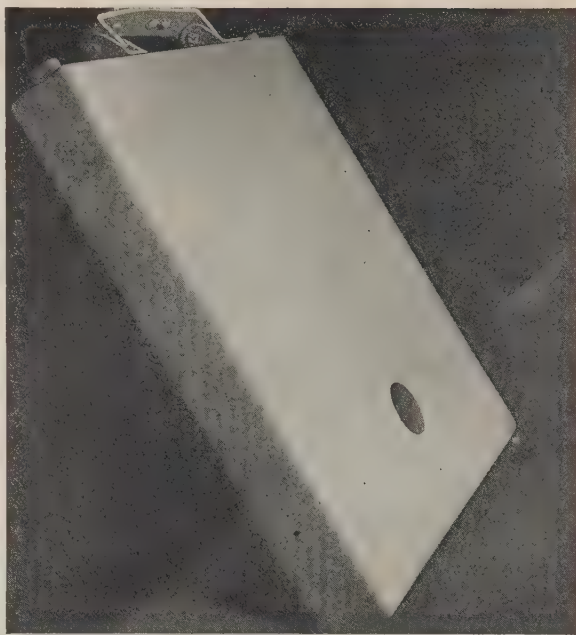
FURNACE DOOR USING CORNER STAMPINGS SHOWN IN FIG. 14
